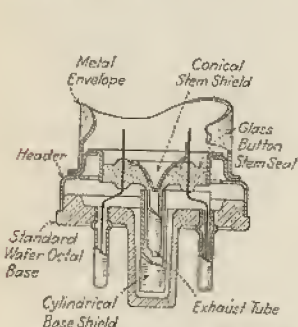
Metal tube base construction (shields used in single-ended types).
